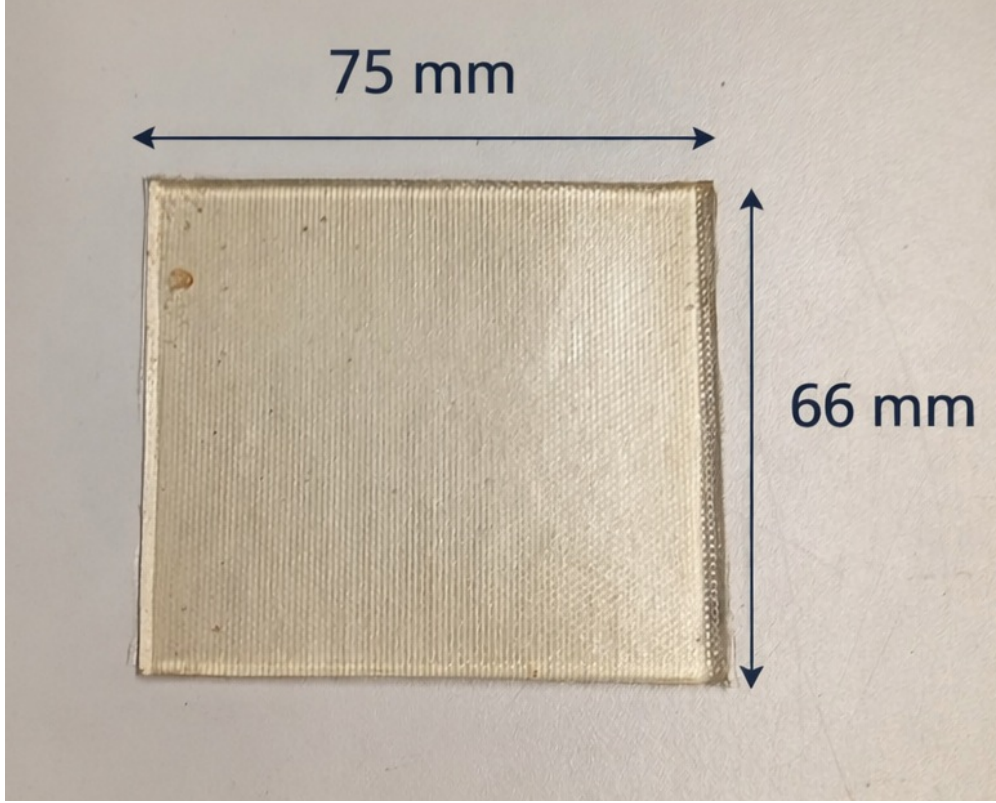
Measured dimensions of the fabricated vitrimer plates.
